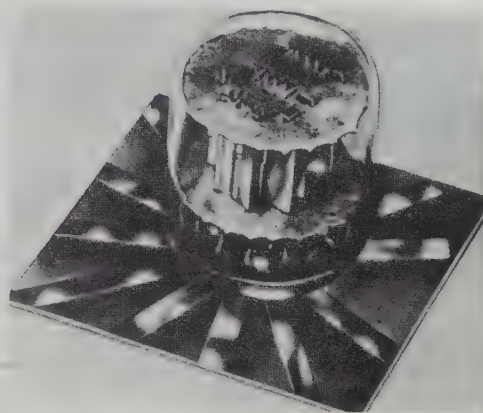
Illustration of a Compactron device plugged directly into a printed circuit board, with pin clips soldered to the board.
